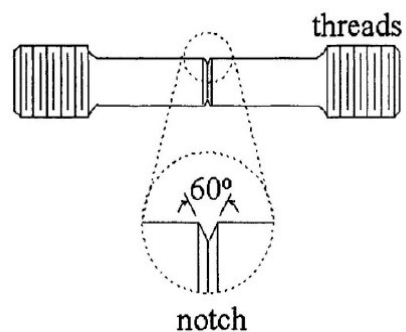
Type 1a specimen geometry ASTM STP 543,[4].
